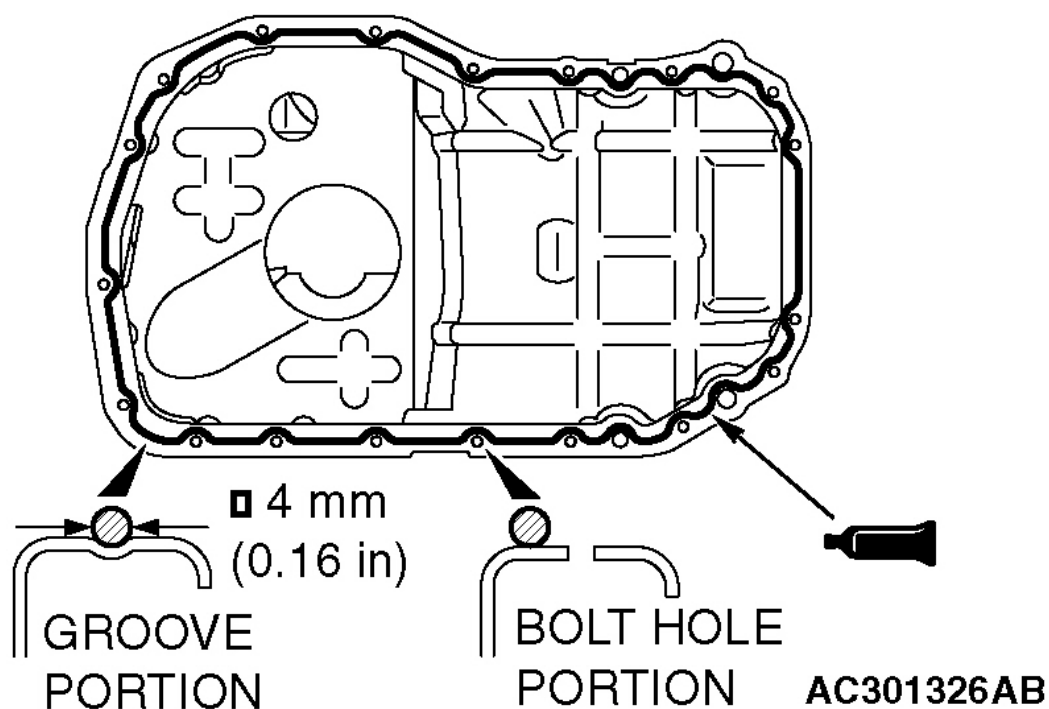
Applying Bead Of Sealant To Cylinder Block Mating Surface Of Oil Pan
